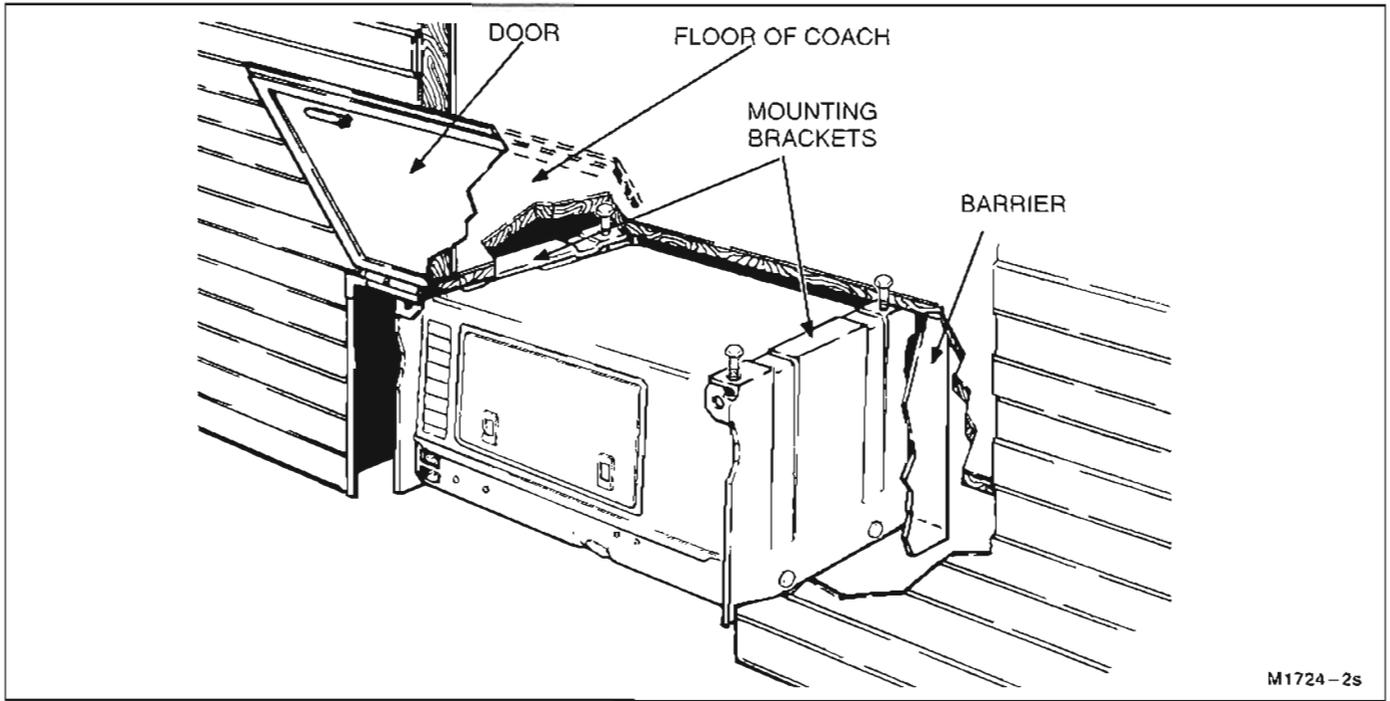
TYPICAL MODEL KV AND KVD UNDER-FLOOR INSTALLATION
